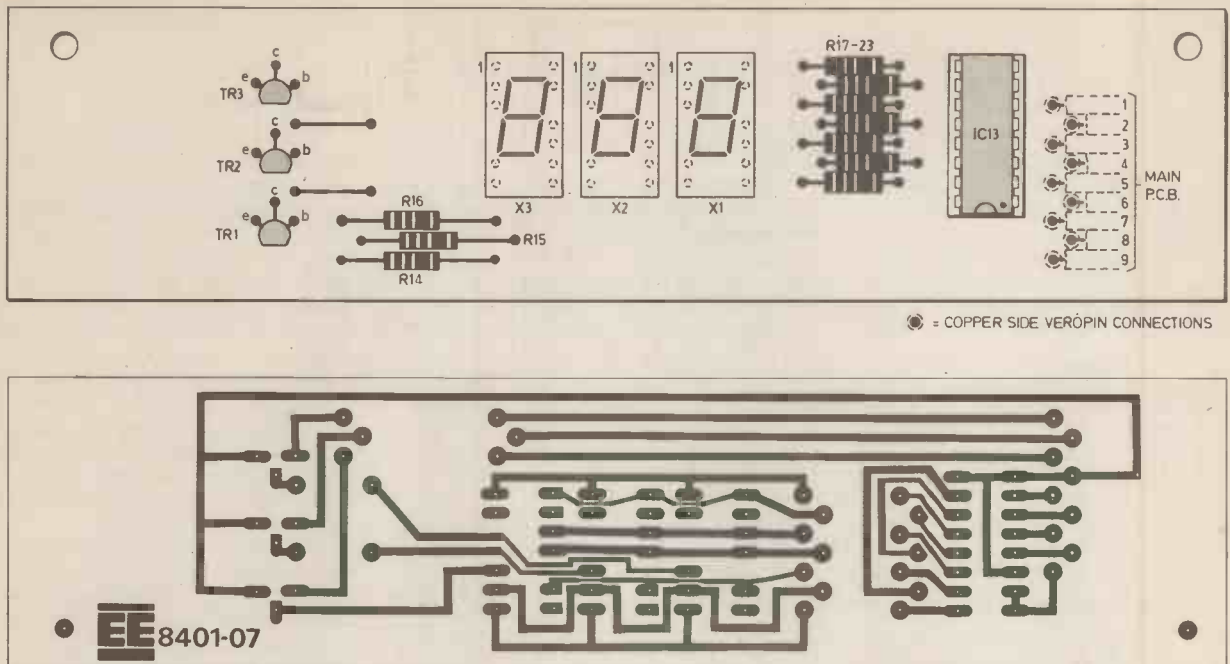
The component layout and full-size p.c.b. artwork for the display board. The board is as wide as shown to utilise the mounting positions of the console case front panel. See Fig. 5 for the mounting of X1 to X3.
